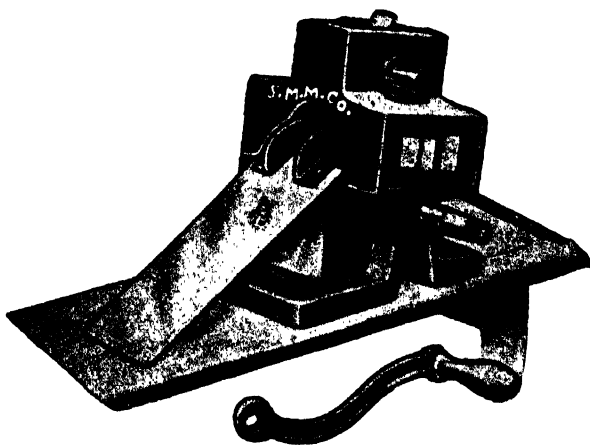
PENNET CUTTING OR CUT BALL MACHINE.
